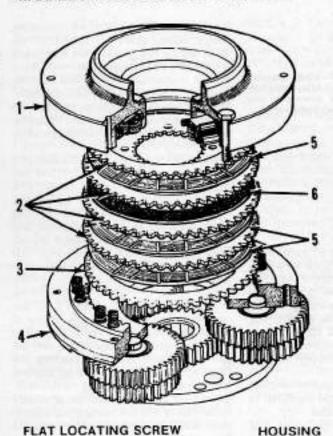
Install backing plate, grooved bronze clutch plates, smooth bronze clutch plate and thin steel clutch plates for rear planetary clutch in sequence shown.
